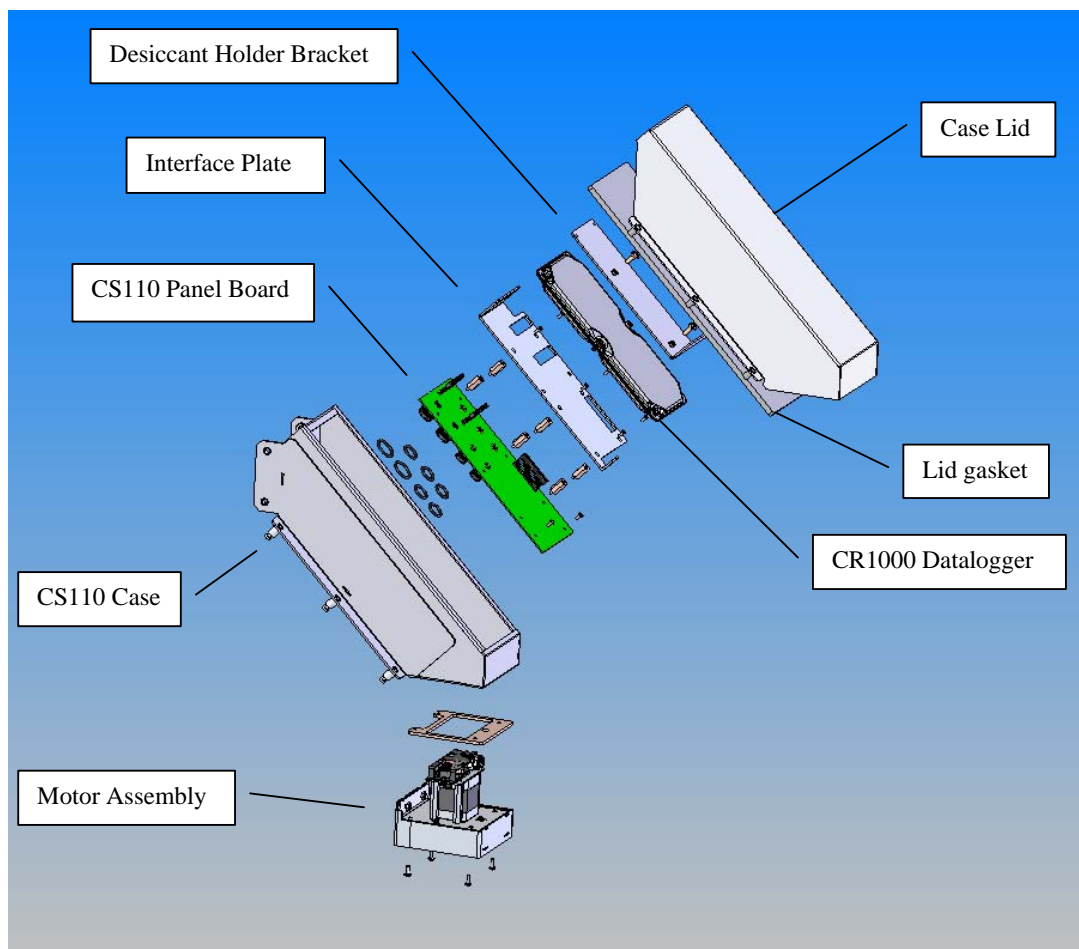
Exploded View of CS110 Electric Field Meter
